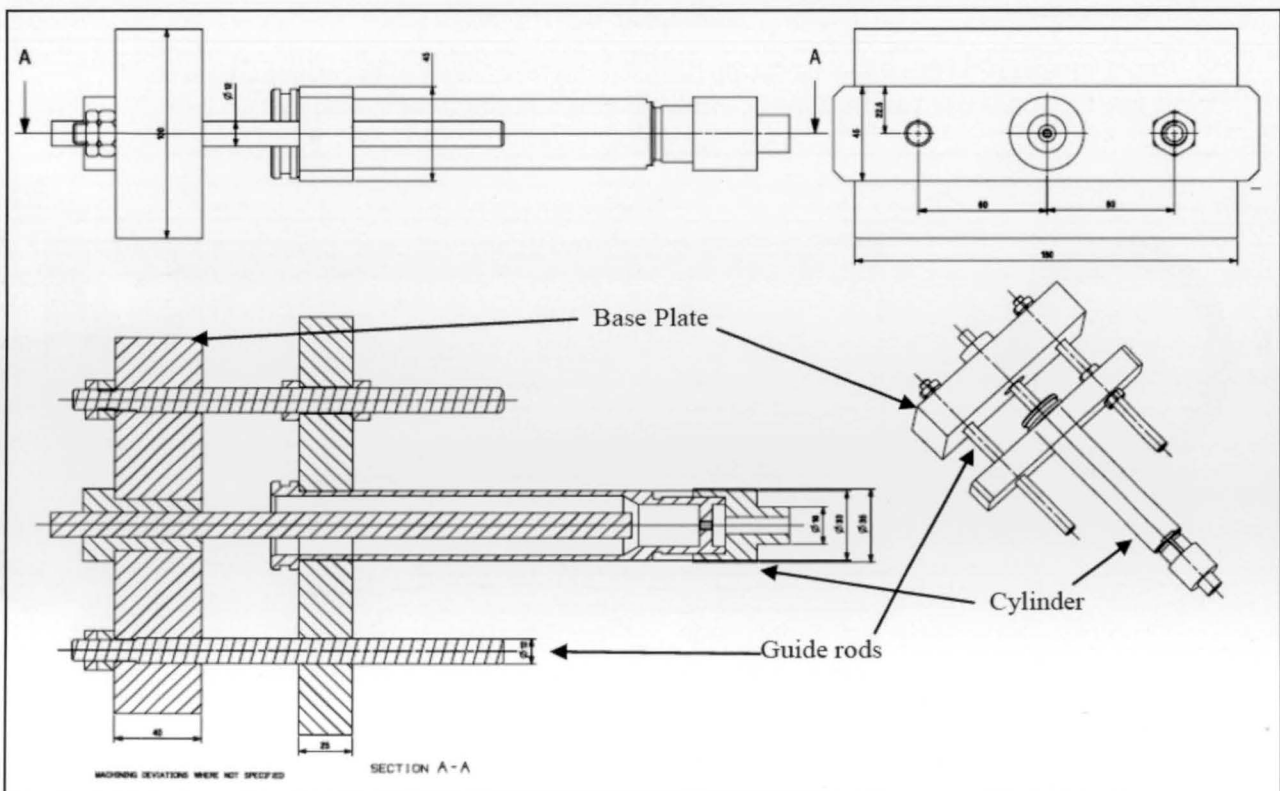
Schematic Details of Special Fixture with Cylinder Set Up
